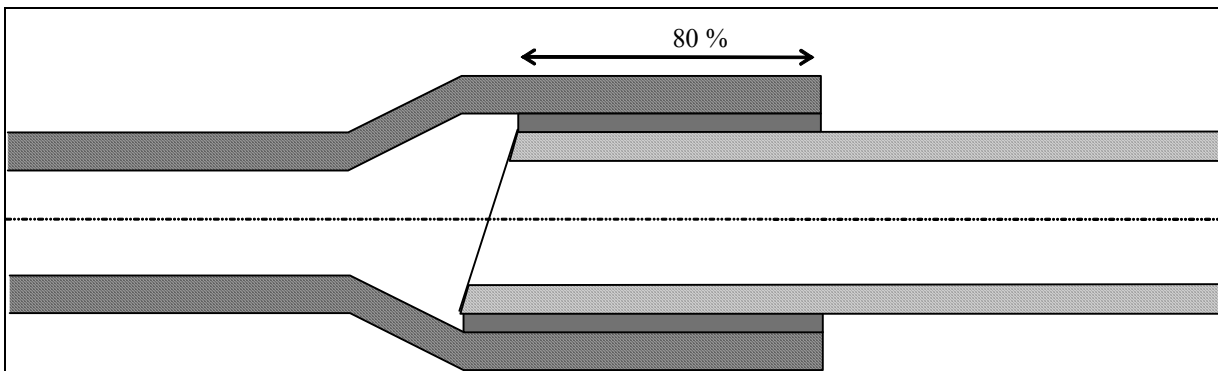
The sketch shows minimum insertion length in bonded pipe joint
